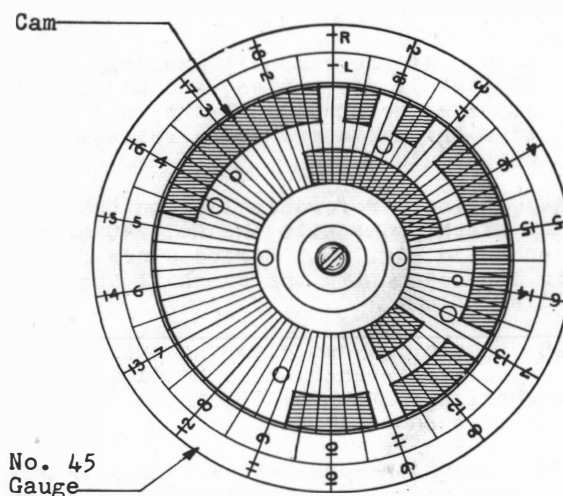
Method of Locating and Checking Positions of 18-position Cams With the No. 45 Gauge
